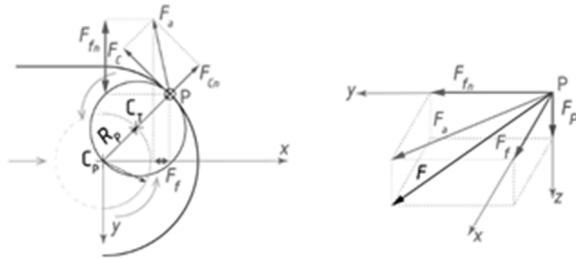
Scheme of cutting forces in 2D and in 3D view
